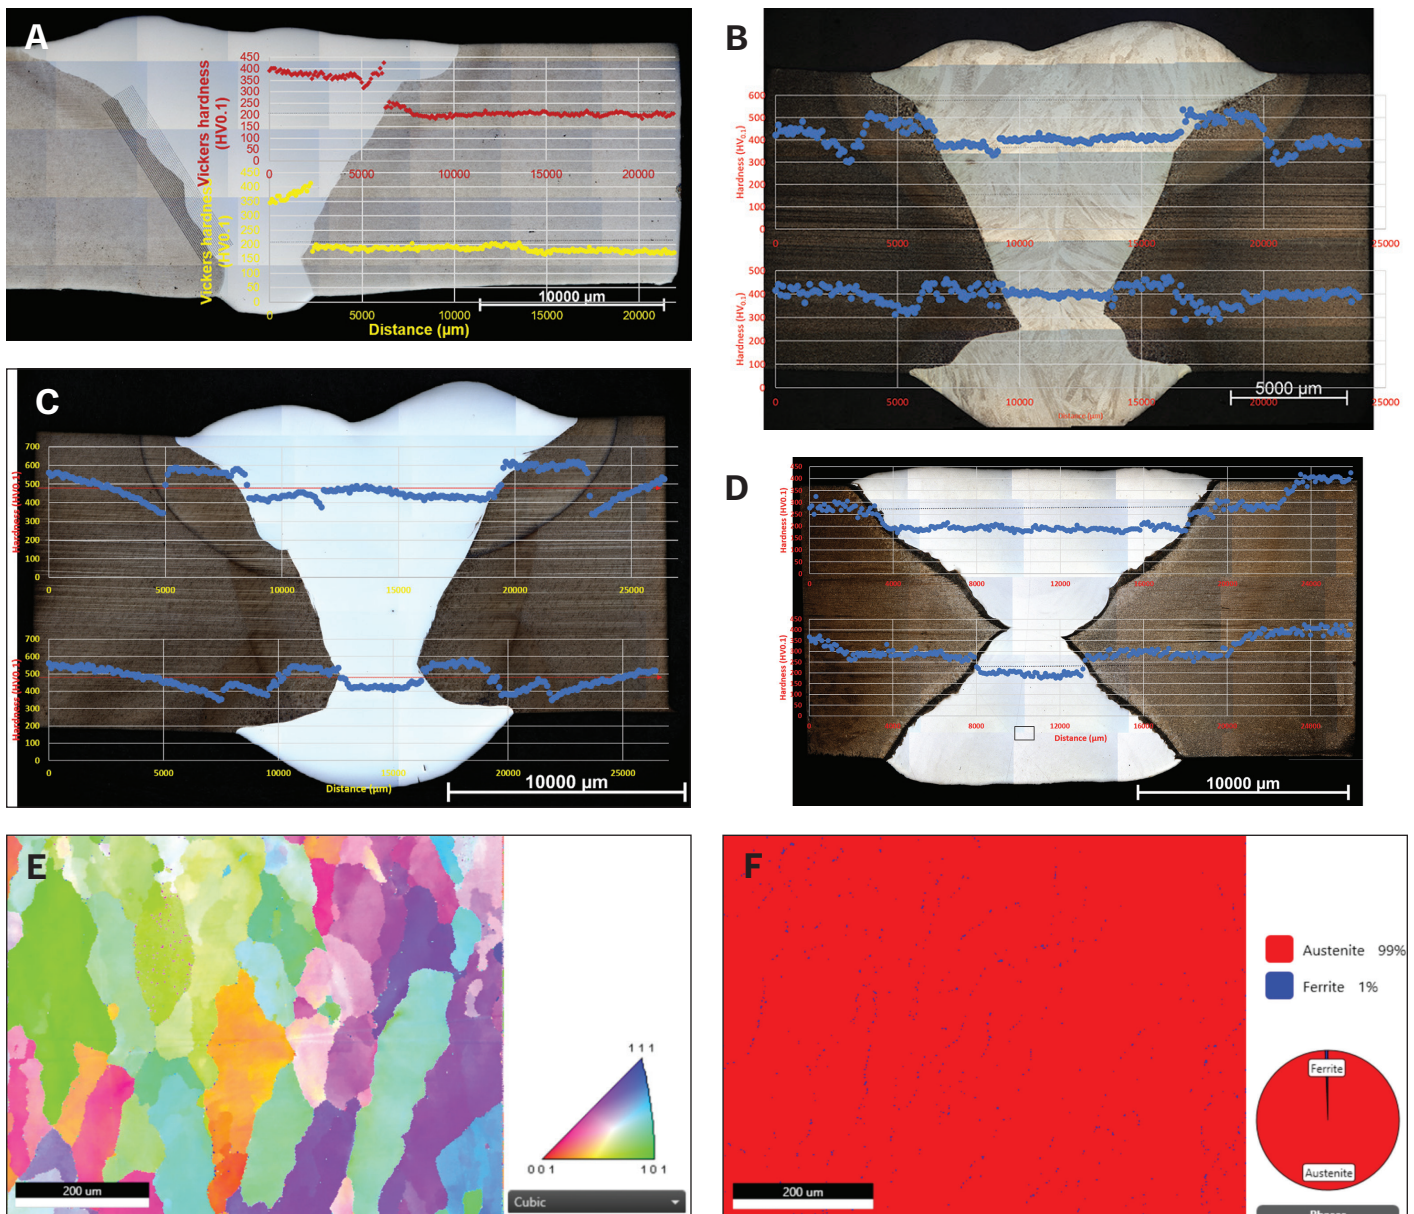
Hardness profiles of four welds: A — X65/1764; B — 12560/1764; C — 46100/1764; D — FeMnAl/1764, E — the inverse pole figure of the framed weld metal region of FeMnAl/1764 in D; F — the phase image of the selected weld metal region in D.
